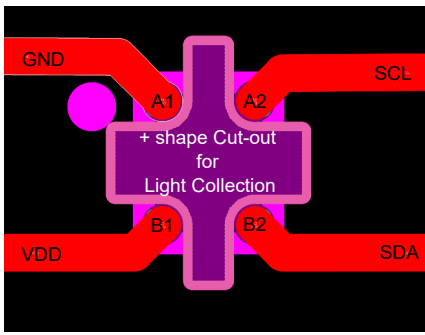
Layout Example With a Plus Shaped Cut Out
